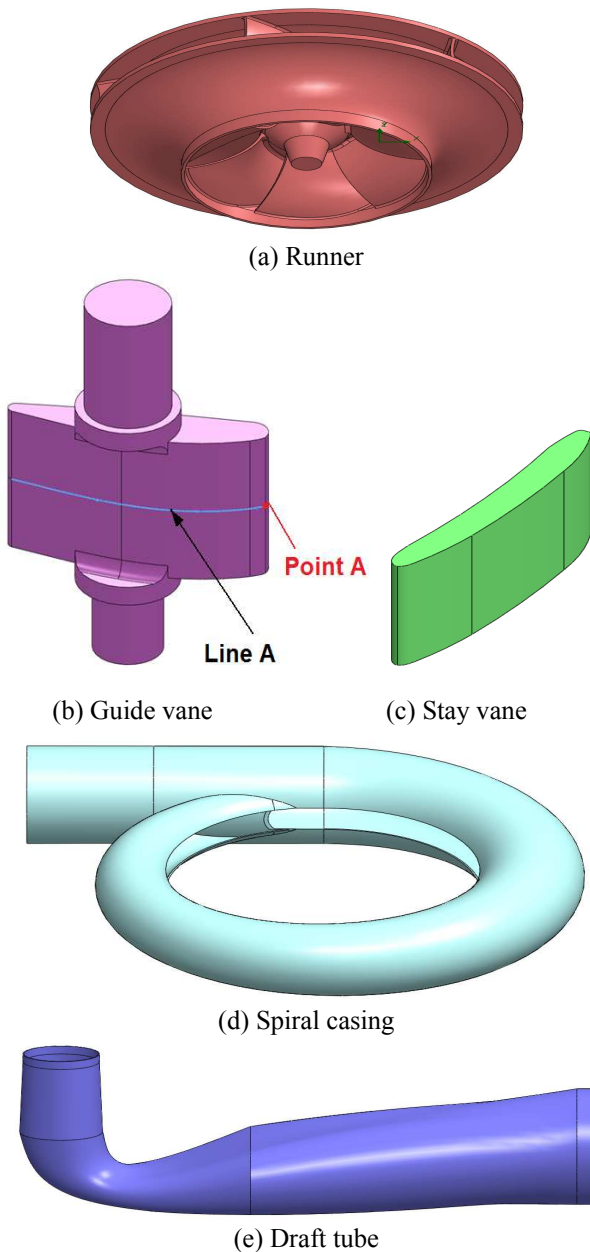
Three dimensional CAD Models of sub-components in the turbine of the target hydropower plant
